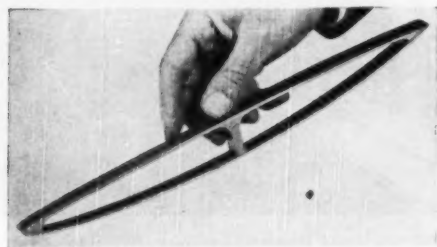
FURNACE-BRAZED STEEL PROPELLER BLADE
